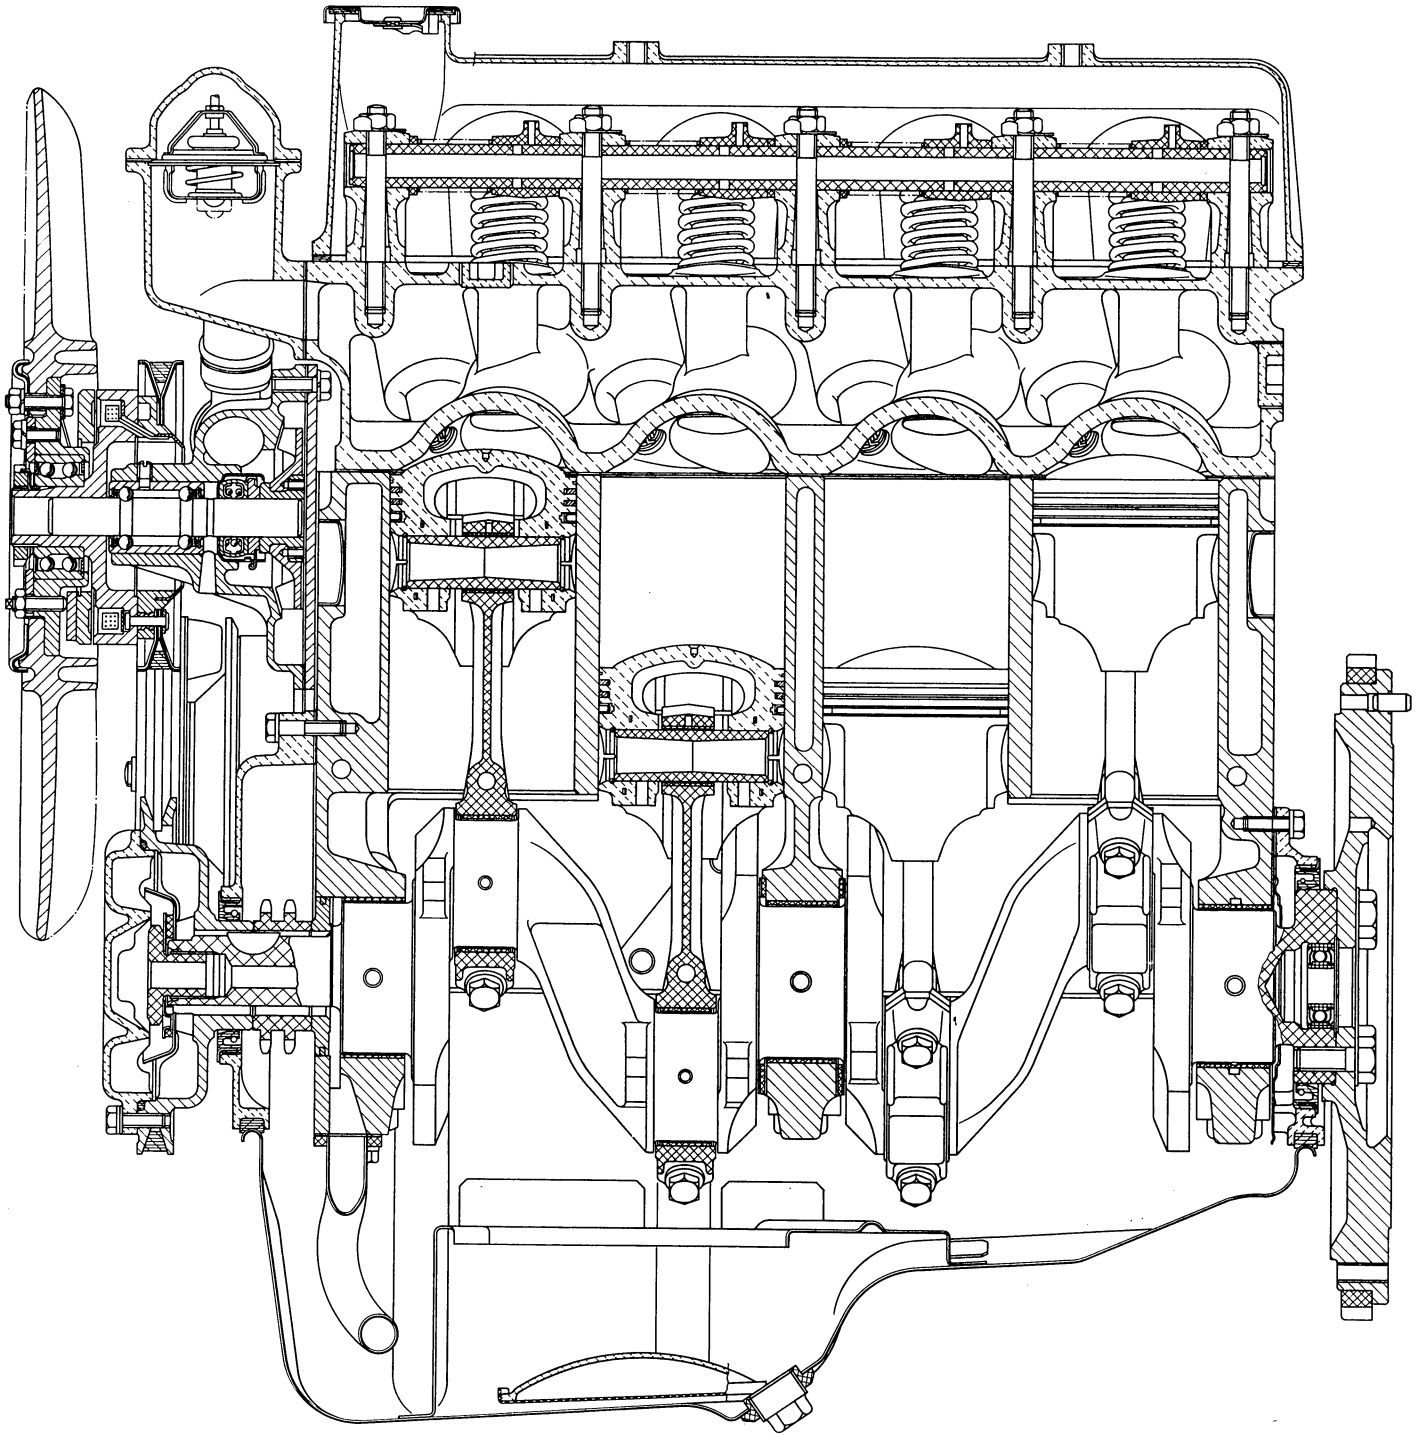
Side sectional view of engine 115 C.005 across cylinders.
